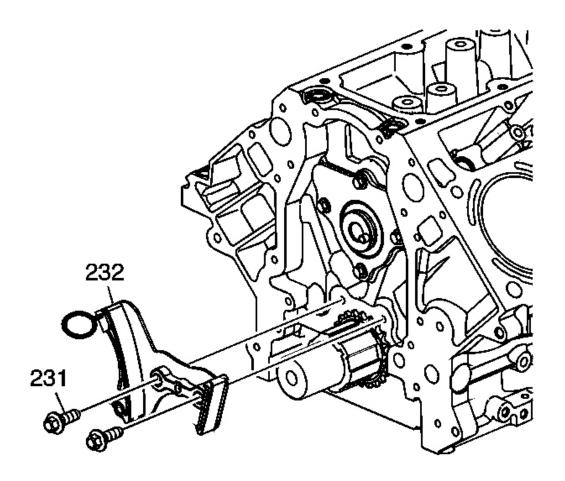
View Of Timing Chain Tensioner Courtesy of GENERAL MOTORS CORP.
